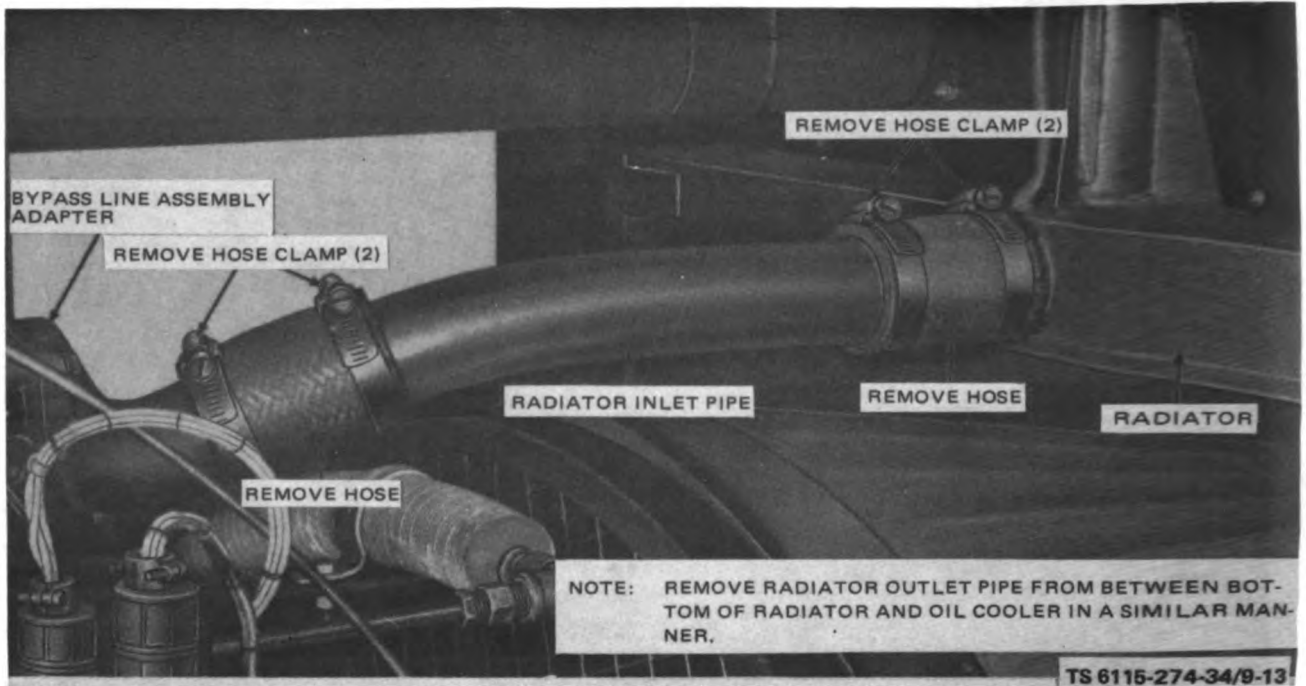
Radiator Inlet Pipe, Removal and Installation
